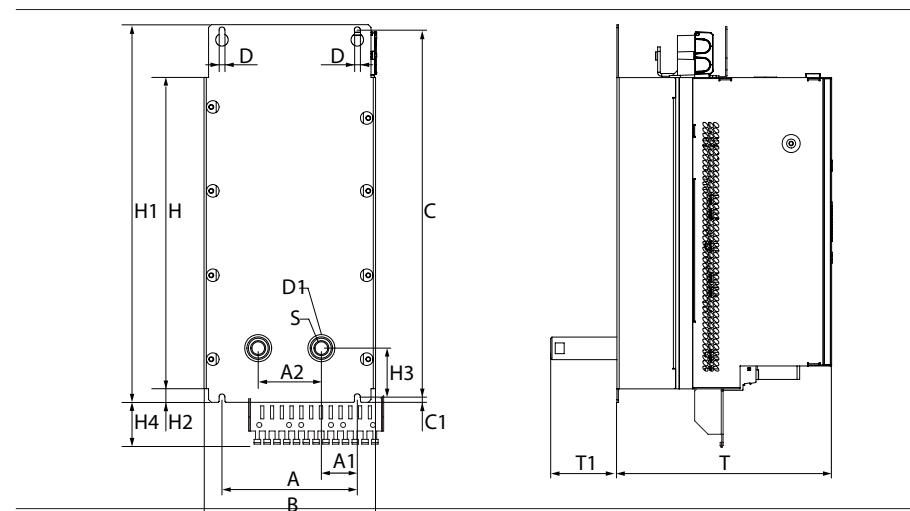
Dimensional drawing, liquid cooling housing variant, based on Size 5 as an example
